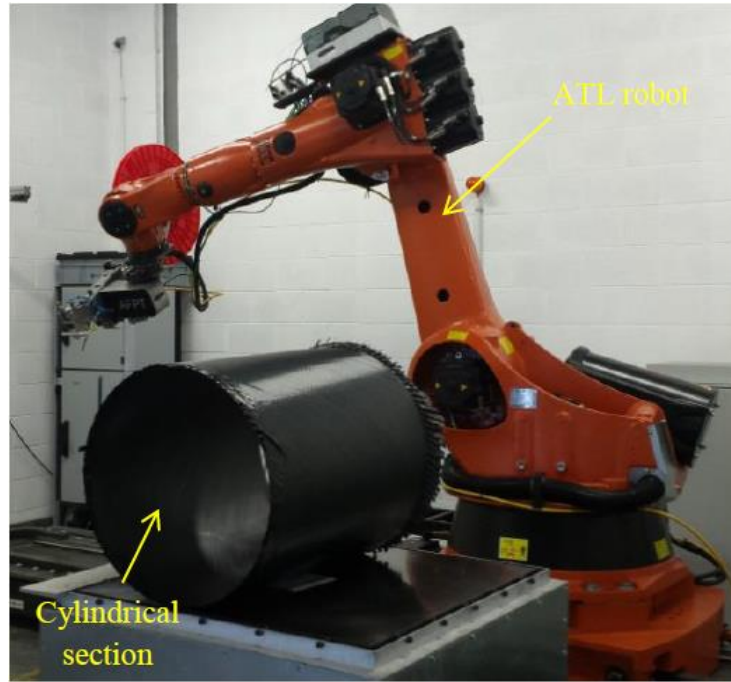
The ICOMP ATL robot used to manufacture the tape-laid specimens used in testing. Shown is a 500 mm diameter CF/PEEK cylinder.
